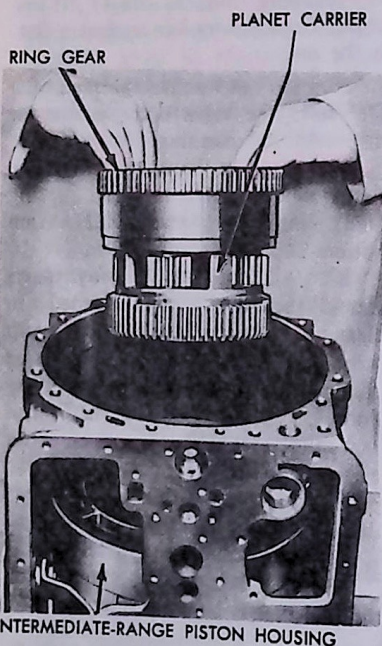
Ring Gear and Planet Carrier Removal and Installation
